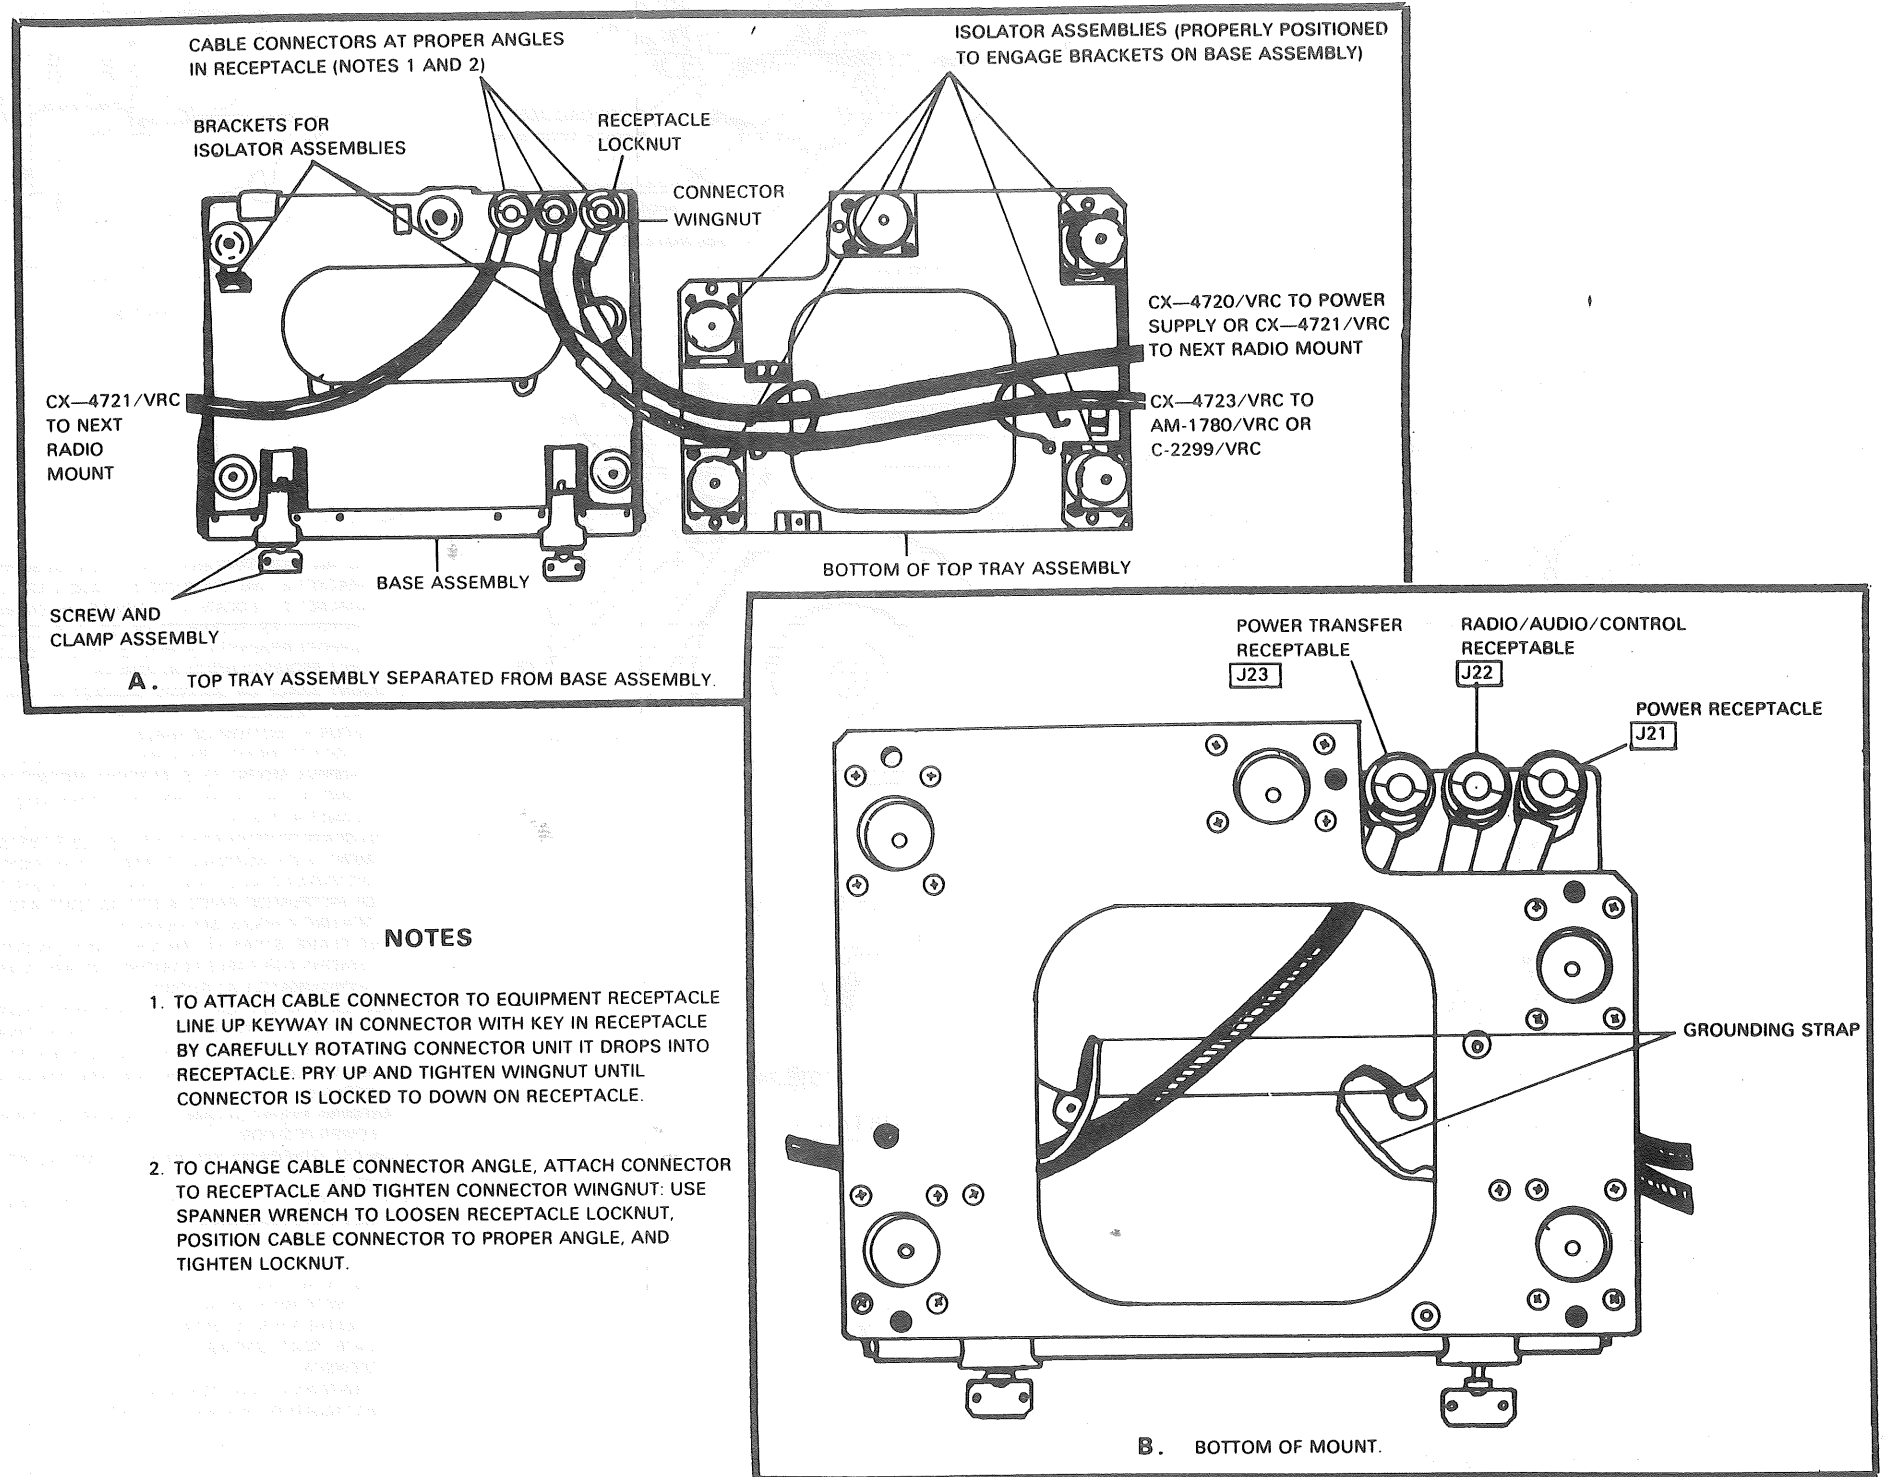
Mounting MT-1029/VRC disassembled and with typical cables attached to receptacles.
